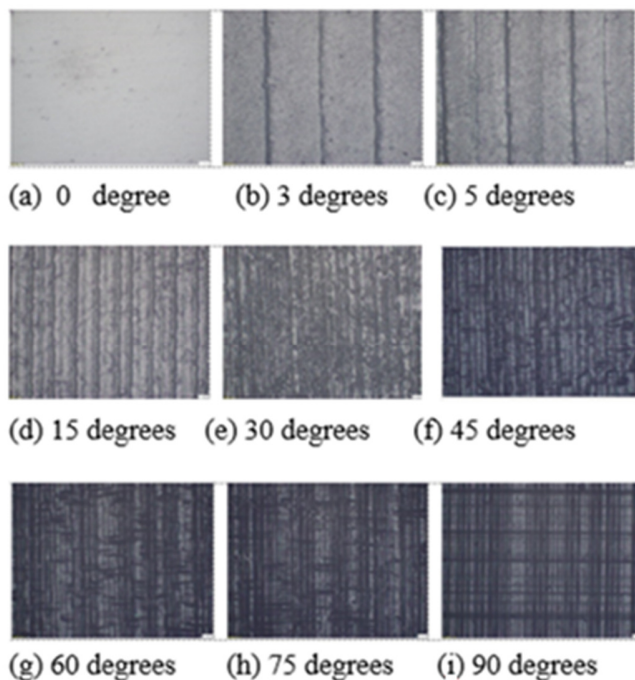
Surface profiles of specimens printed with TR-300 resin at different angles.
